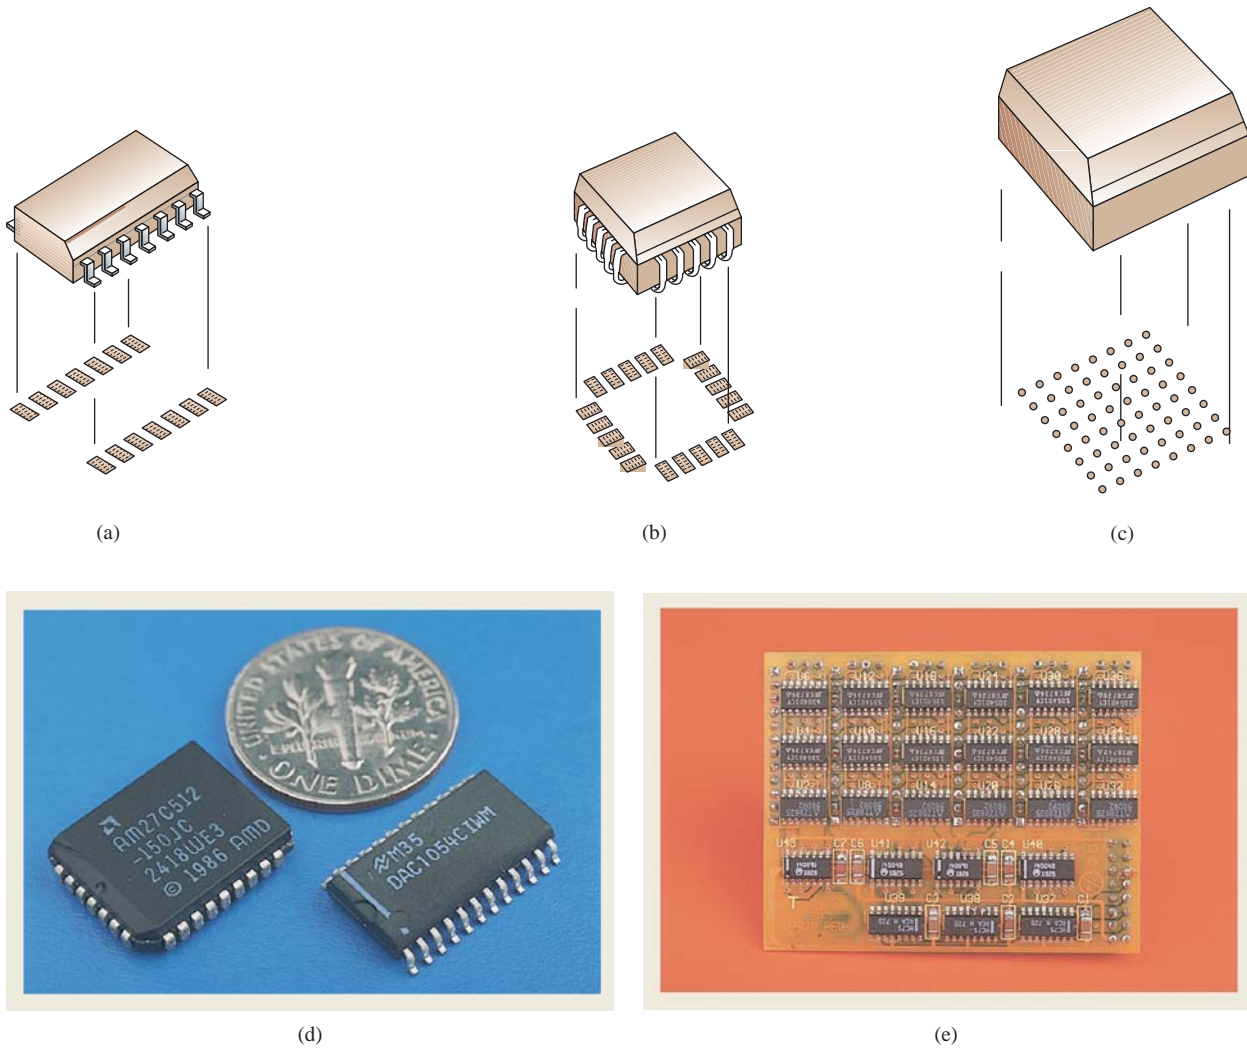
Typical surface-mount devices (SMDs) and their footprints: (a) small outline (SO); (b) plastic leaded chip carrier (PLCC); (c) ball grid array (BGA); (d) photograph of actual SMDs; (e) photograph of SMDs mounted on a printed-circuit board.
